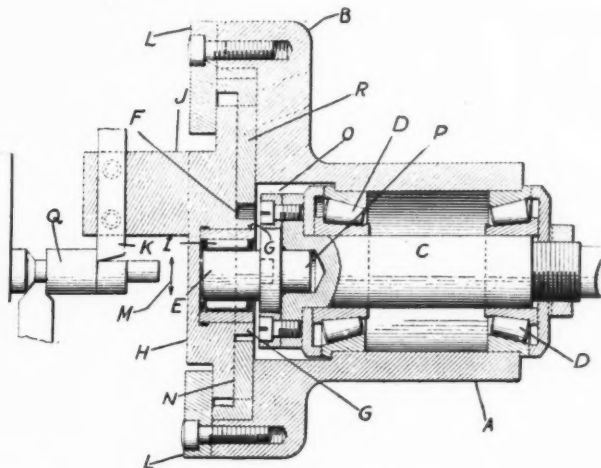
By means of a reciprocating slide this tool performs eccentric turning in an automatic
